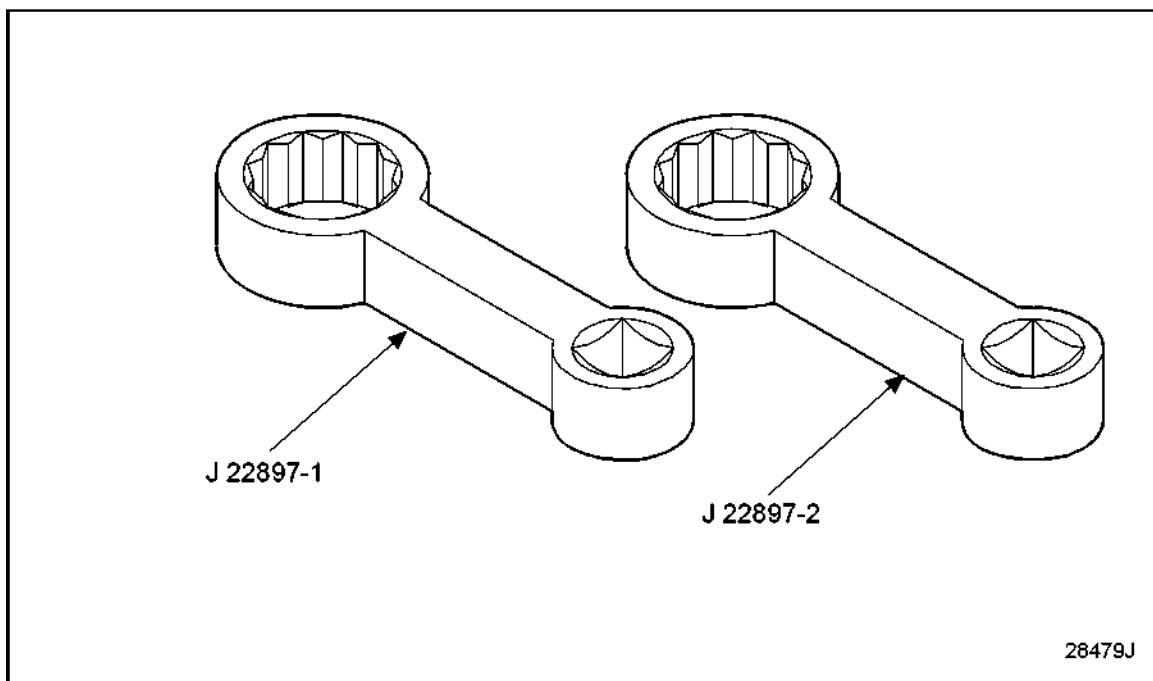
Crankshaft Torque Wrench Adapter Set, J 22897
